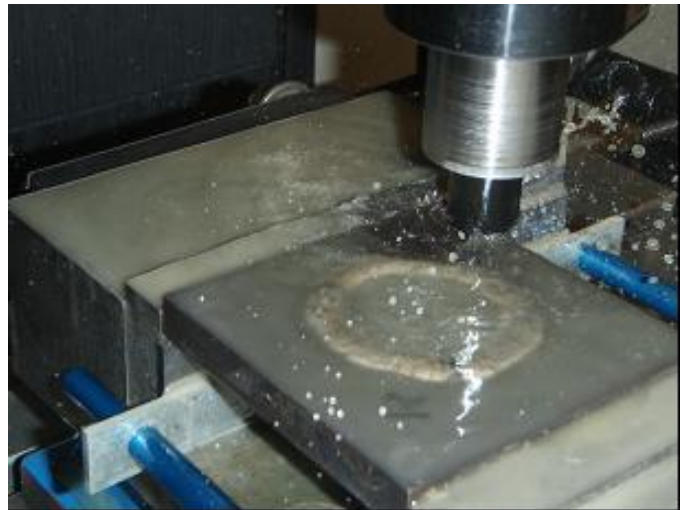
LPB processing of a 316L circular weld specimen.
